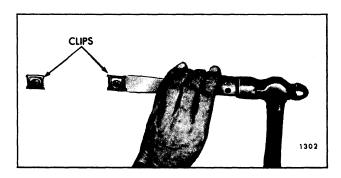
Removal of Bath-Tub Type Molding Clip
